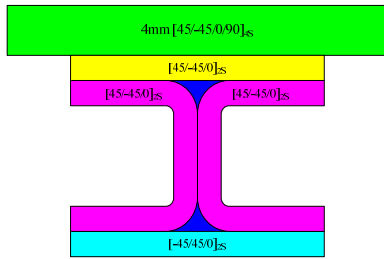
Lay-ups of I-section stringers stiffened composite panel
